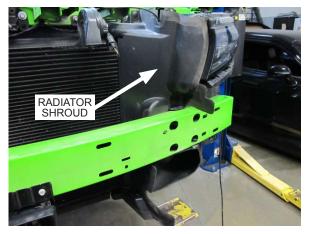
k: Remove both radiator shrouds (Driver side shown)
